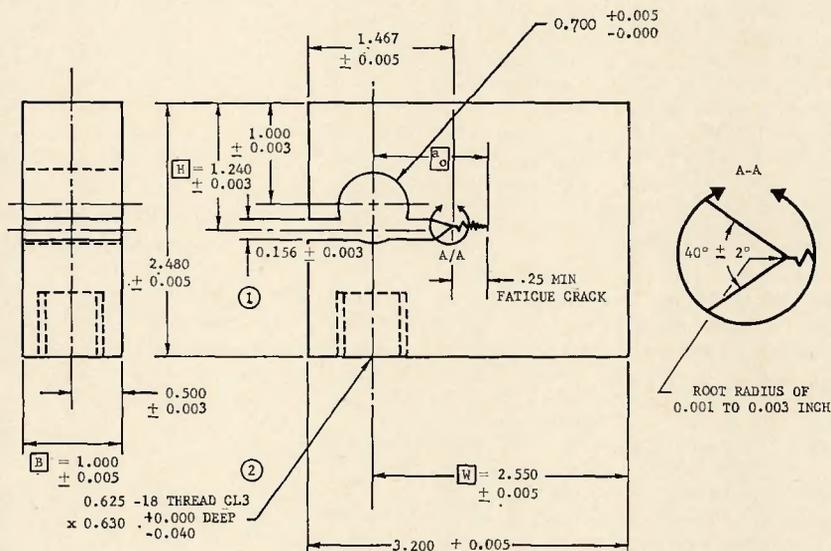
IT-type wedge-opening-loading (WOL) specimen for base metal. Notes: (1) bore and slot perpendicular to threads and face within 0.003; (2) center line of thread must coincide with center line of bore within 0.003; (3) both 3.200 × 2.480 surfaces to be 32| or better with machine; (4) markings perpendicular to fatigue-crack axis; (5) do not grind any surface
